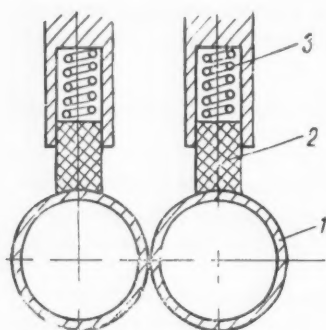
Roller seal 1) steel roller; 2) asbestos brush; 3) spring.
